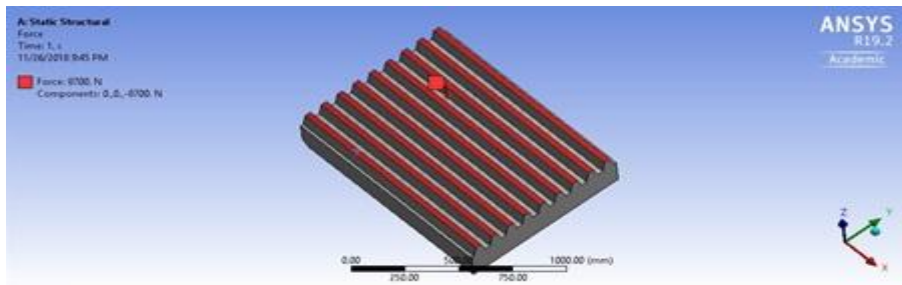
without stiffener Jaw Plate Model Applying Loads
